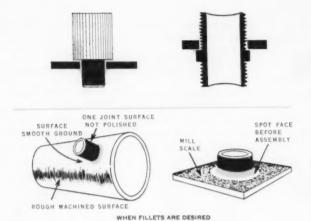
(Left) Rough-machined surfaces, rust, and mill scale will prevent formation of fillets. Provide smooth surfaces or a blocking lay of tool marks to prevent capillary flow away from joint where fillets are desired. Fig. 13. (Below) Blasting of parts with steel grit before assembly will prevent fillets from forming.
